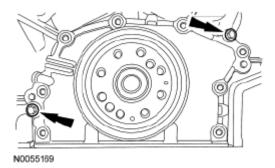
Locating Crankshaft Rear Seal Retainer Bolts Courtesy of FORD MOTOR CO.
